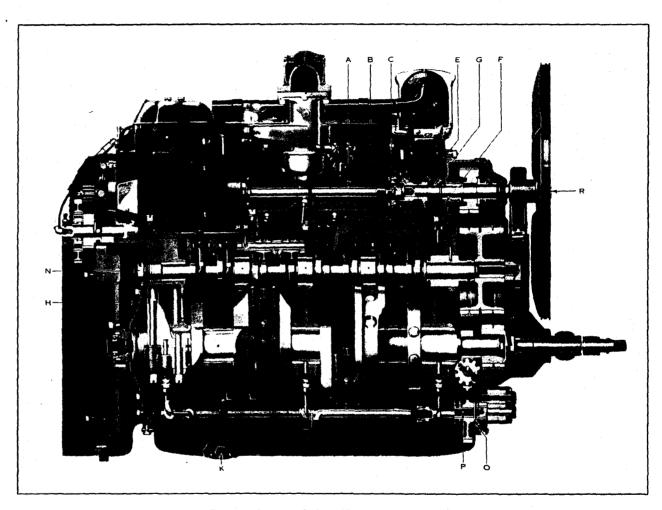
Sectional View (Longitudinal) of V-63 Engine
